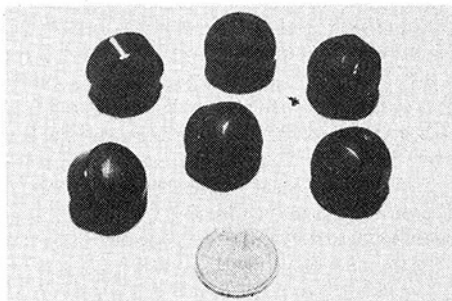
Hot-pressed blank for a 20 mm dia ball
